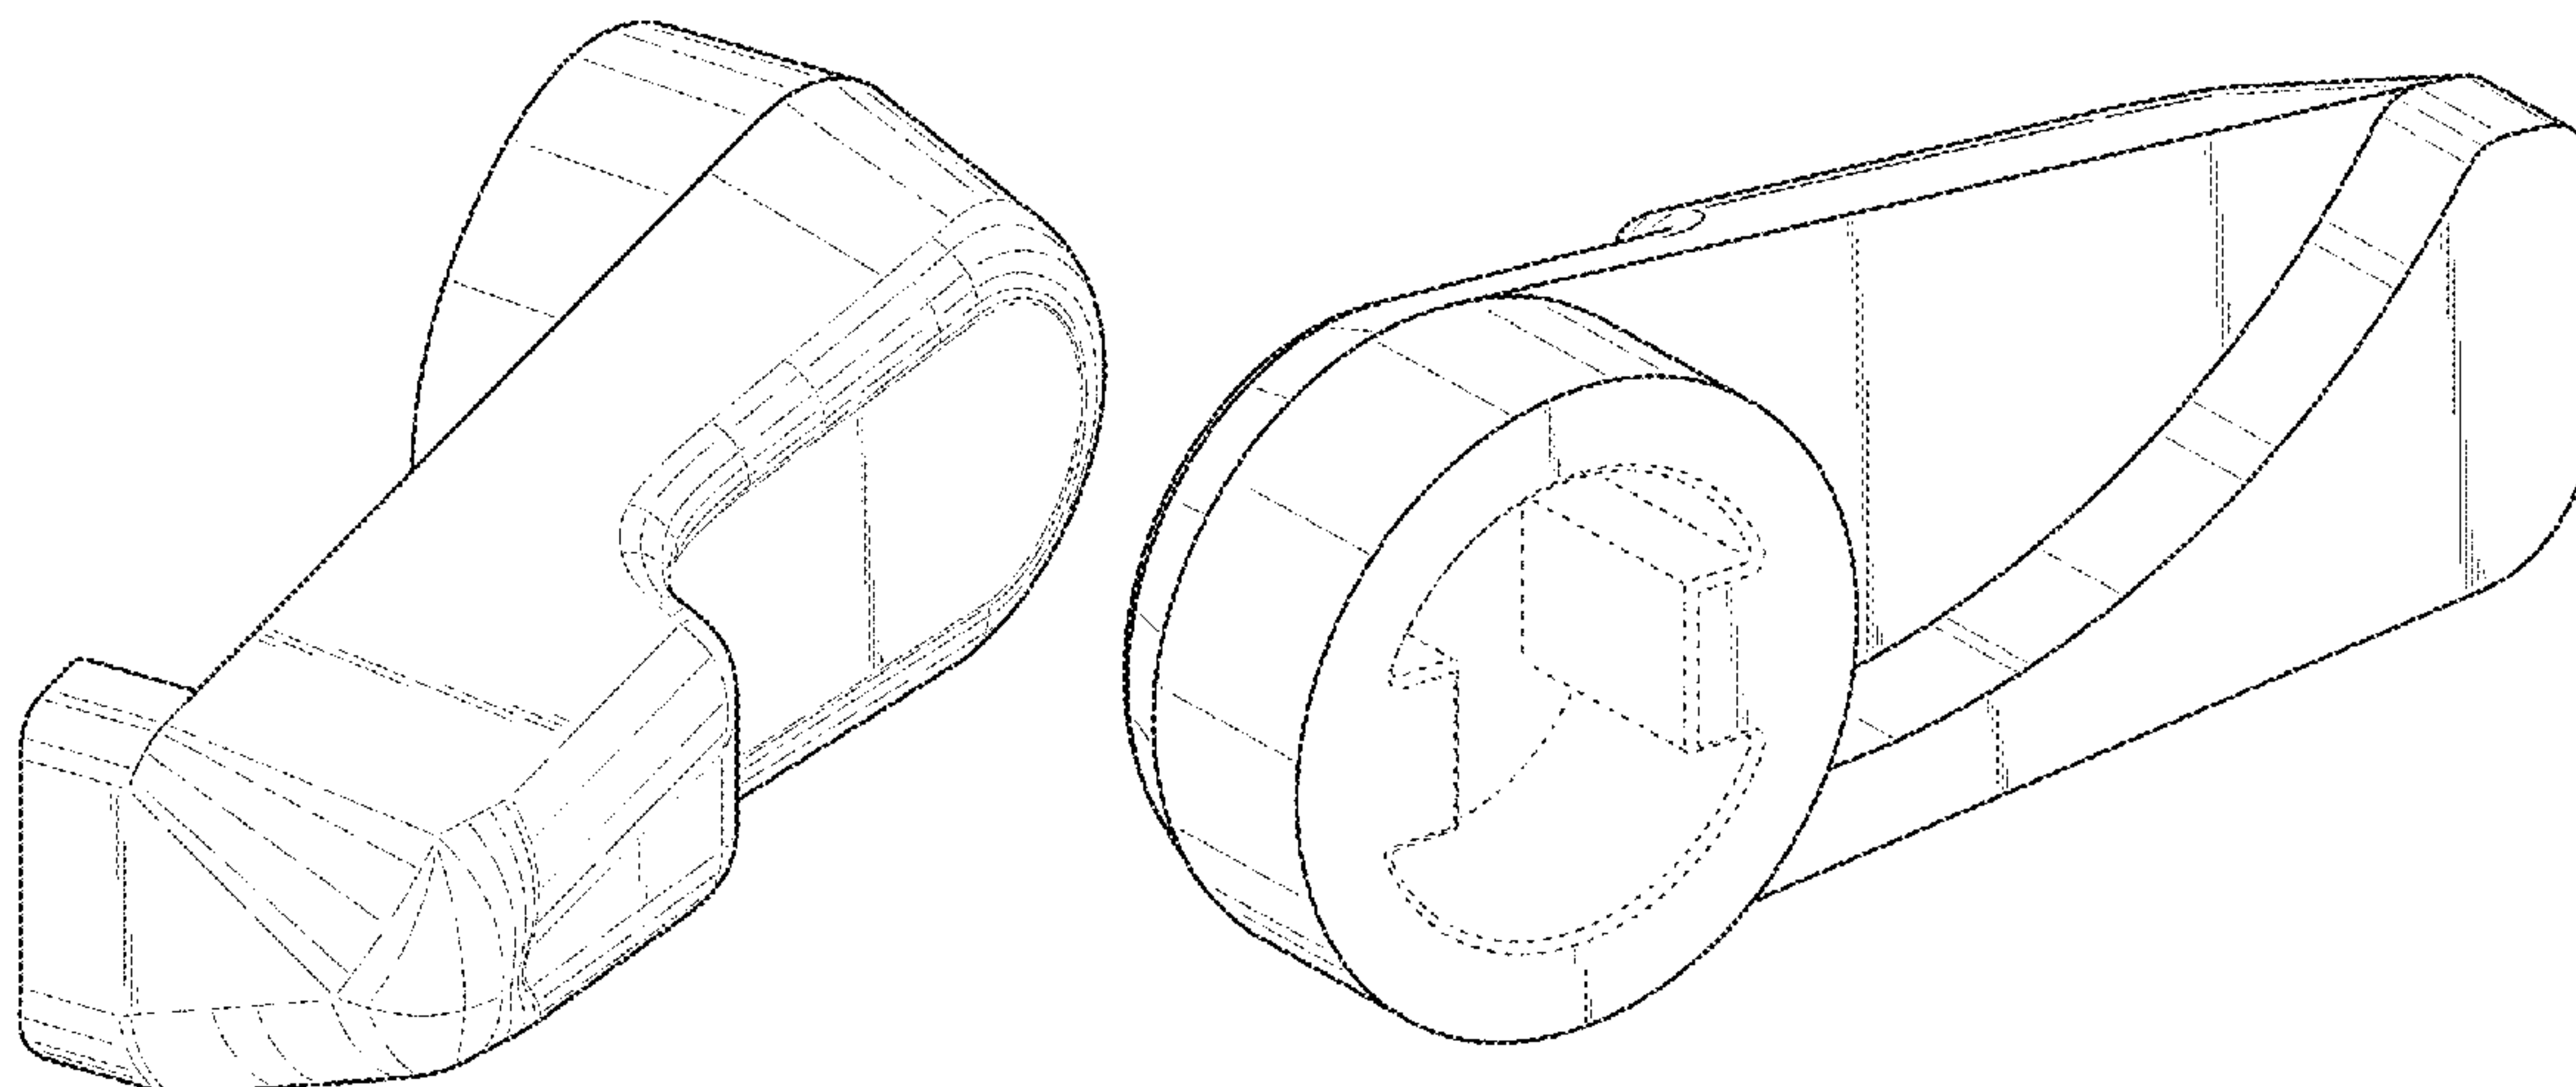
is a top view of the L-shaped blade trigger for an electrosurgical instrument of FIG. 1;
